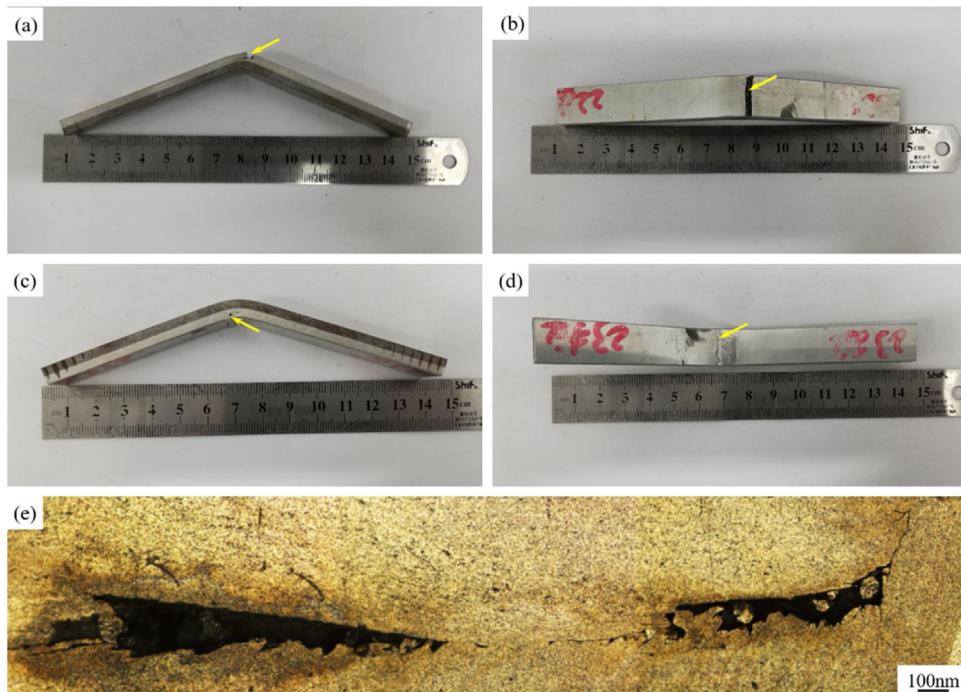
Bending specimens of composite plate after FSP with two passes: (a) aluminum under tensile in side view; (b) aluminum under tensile in top view; (c) aluminum under compression in side view; (d) aluminum under compression in top view; (e) longitudinal section of the bending sample for cracks propagation under bending load.
